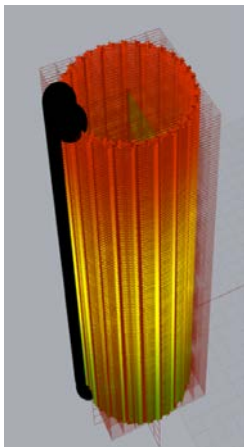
Extruder paths for 3D printed tube generated in Grasshopper
